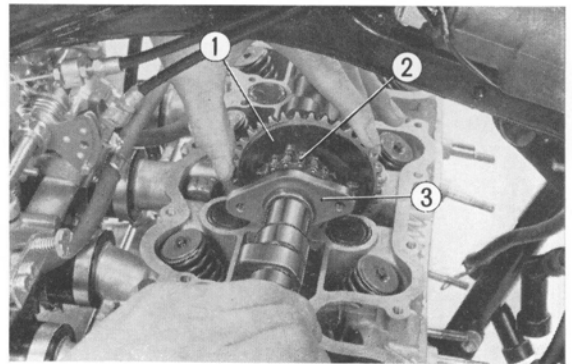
① Cam sprocket ② Cam chain ③ Camshaft
